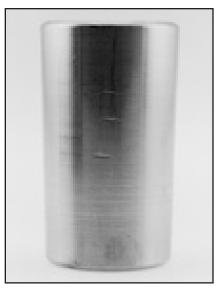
Rough handling or installation damage resulted in nicks and dents in this tapered bearing roller.
